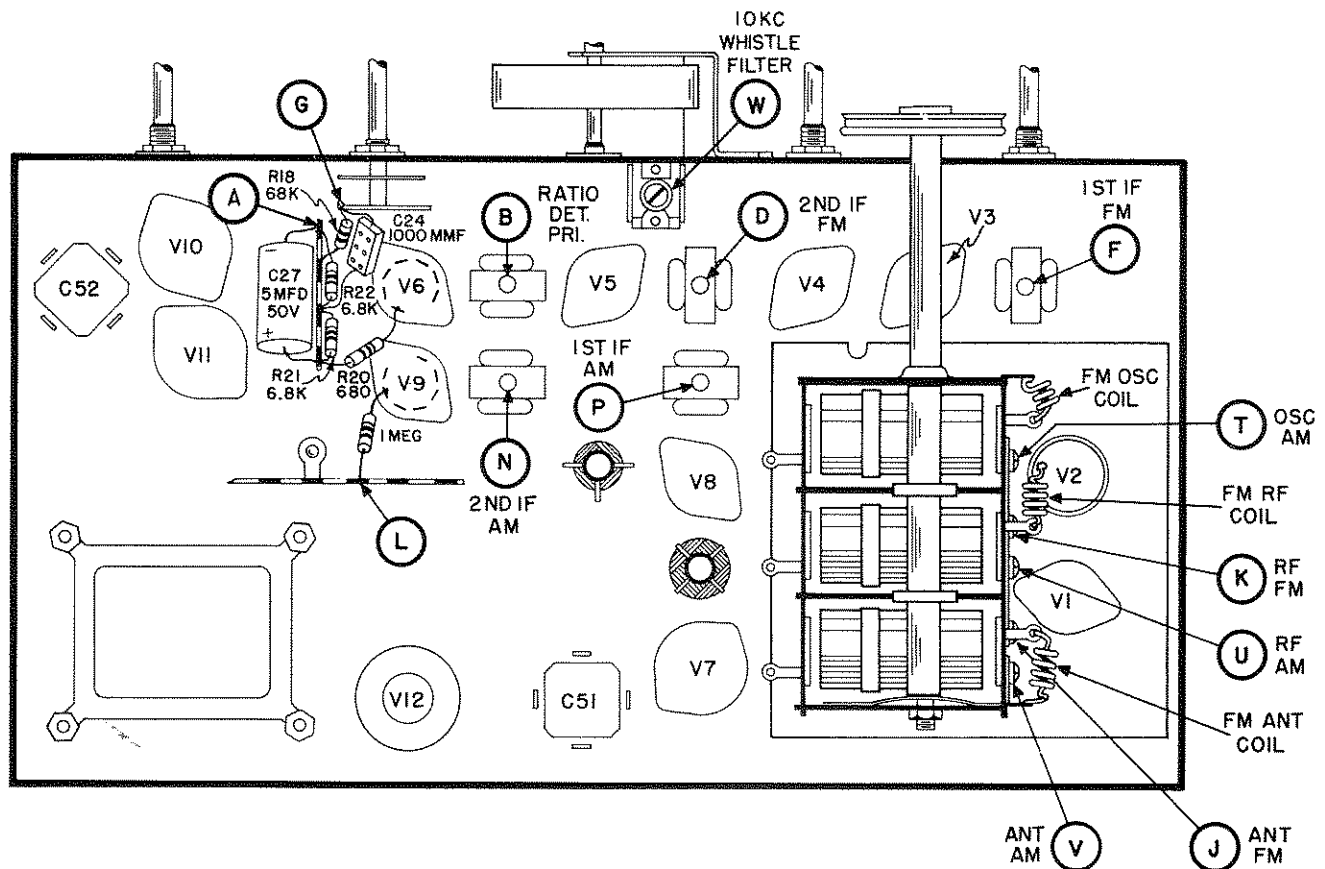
Bottom View of Tuner Showing Location of Alignment Adjustments
